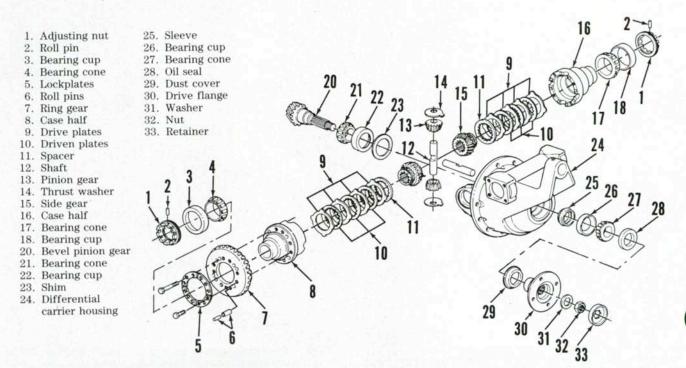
Exploded view of differential assembly and bevel pinion gears used on APL-365 type front axle.
